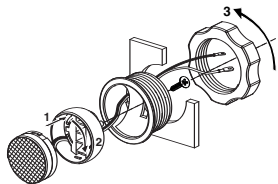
Mounting the GTO607C woofer without the metal adapter.
